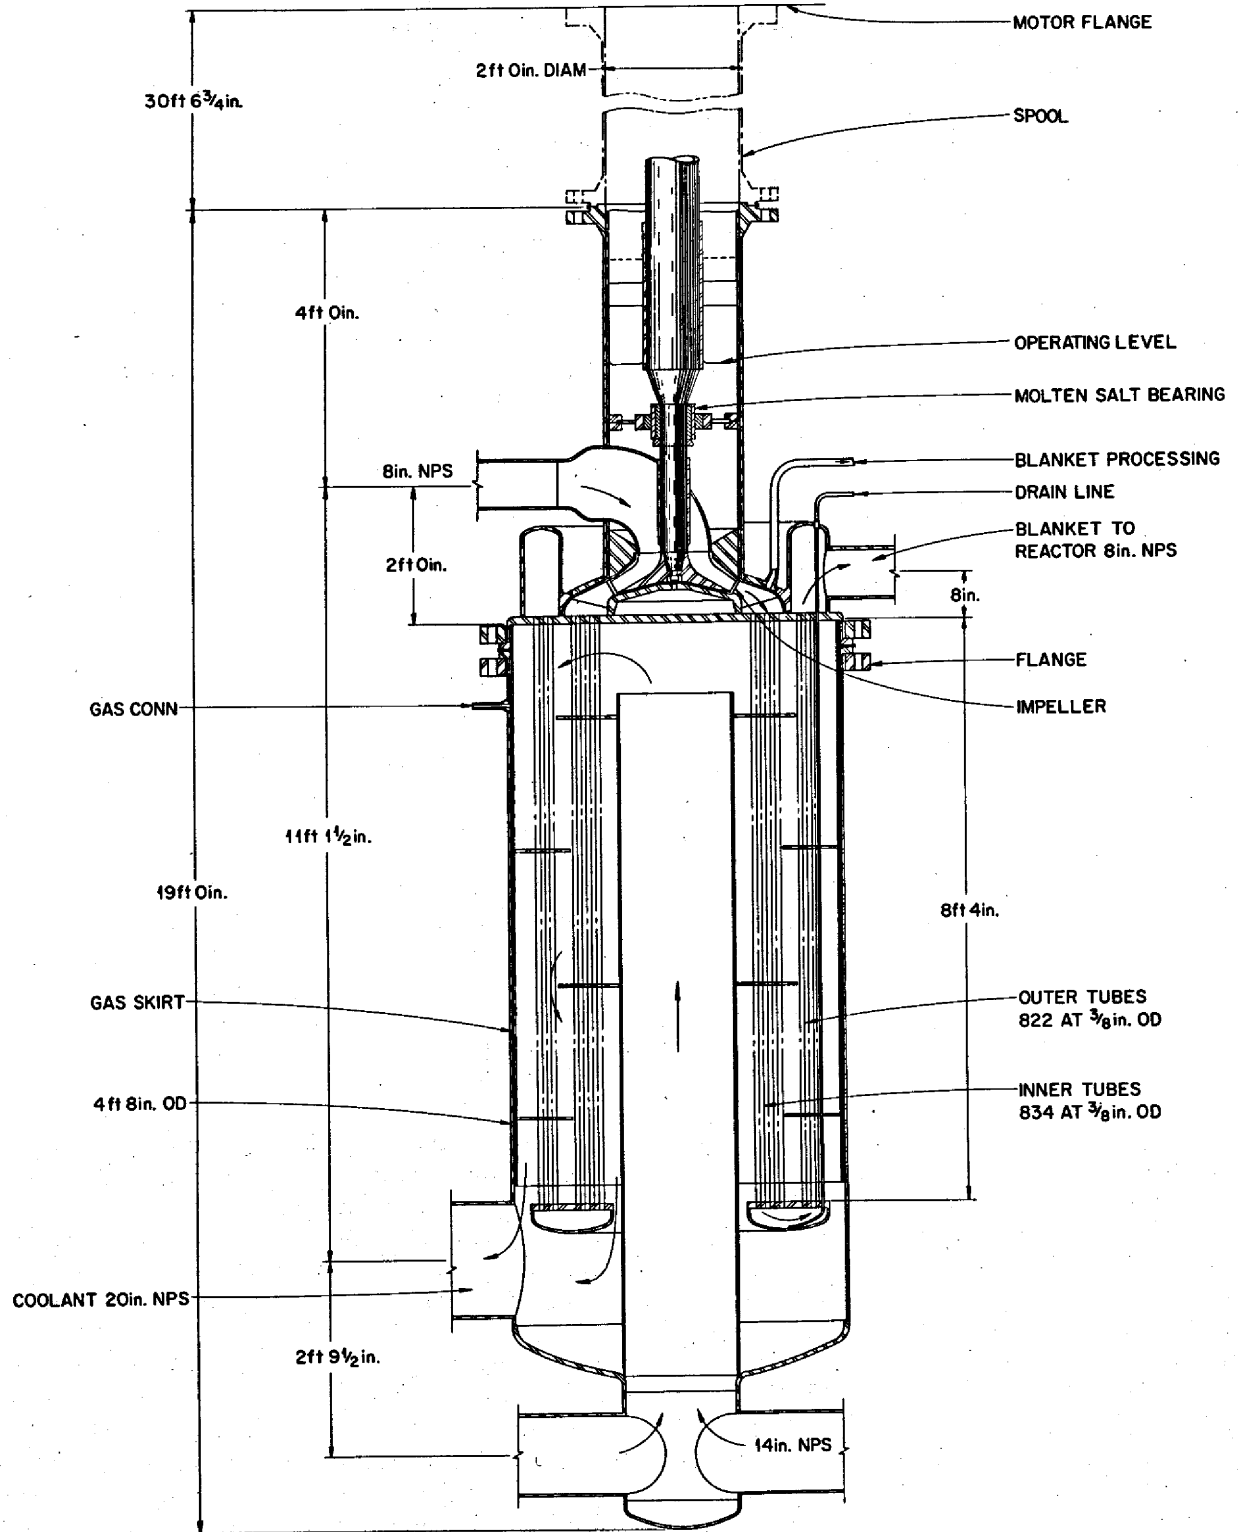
Blanket Salt Primary Heat Exchanger and Pump Assembly for 250-Mw(e) Reactor Module.
